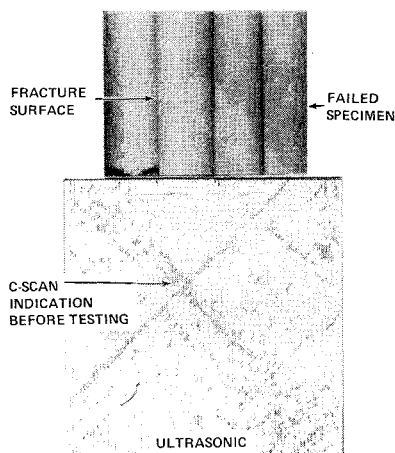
Ultrasonic C-scan detected the presence of seam defects which ultimately resulted in fatigue fracture.
